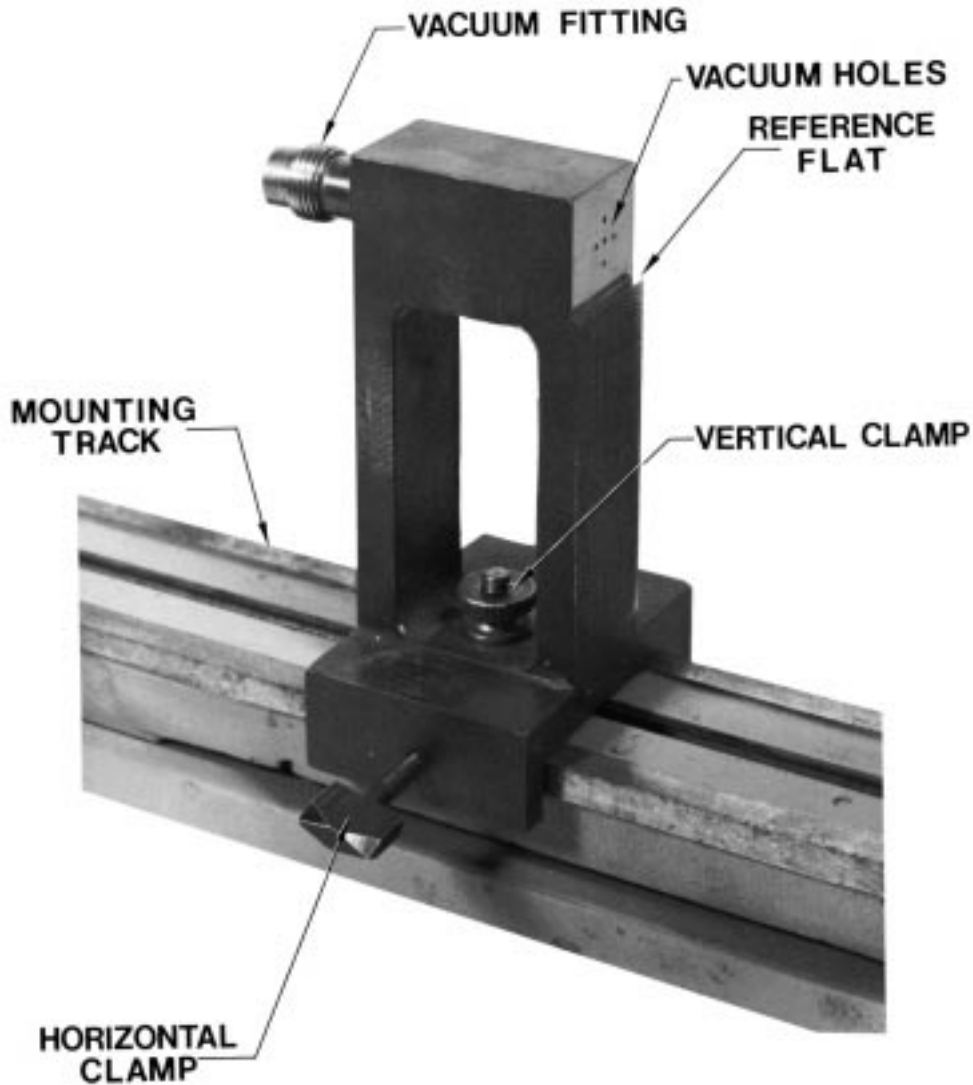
Photograph of Wafer Holding Fixture and Mounting Track
